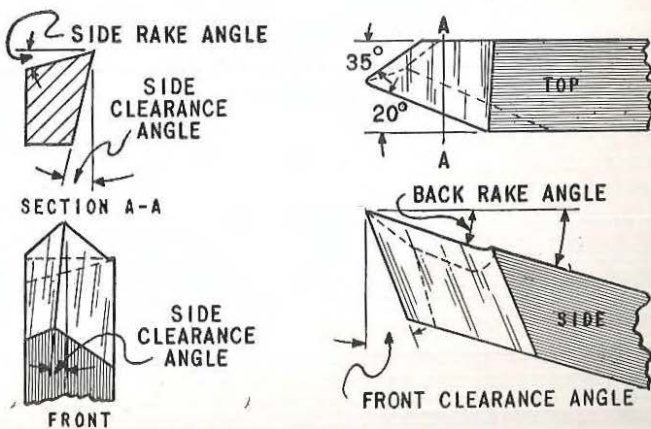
Excellent R. H. Tool for general turning and shouldering toward headstock; also facing. Point should be rounded for finishing work.
